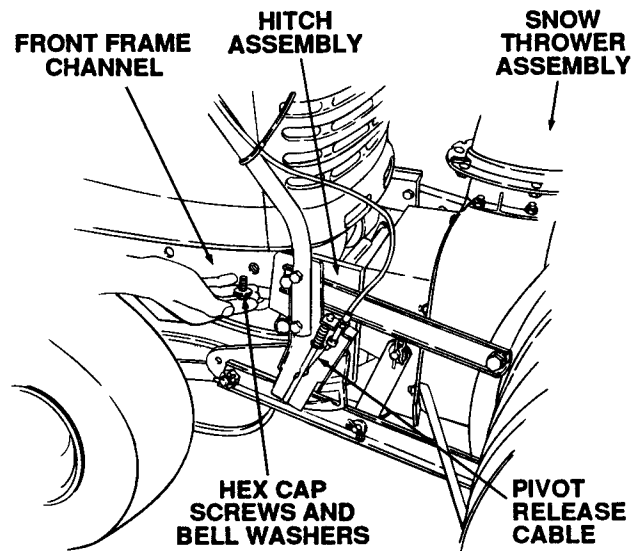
Attaching Snow Thrower to Tractor Frame.
